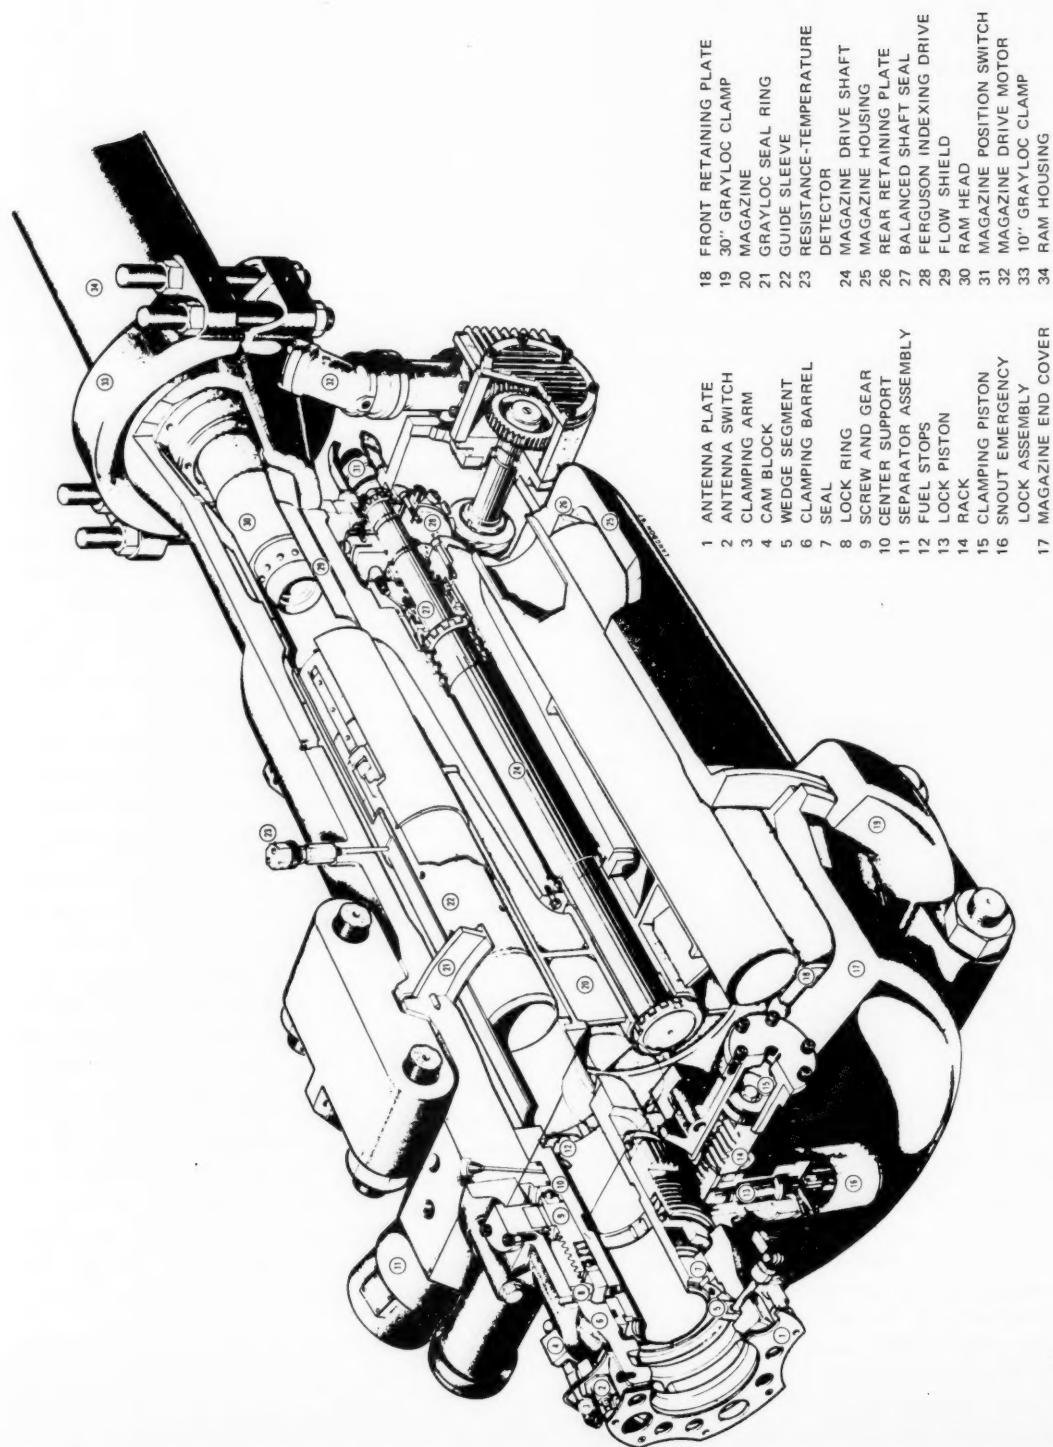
Pickering fueling-machine head snout and magazine assembly.
